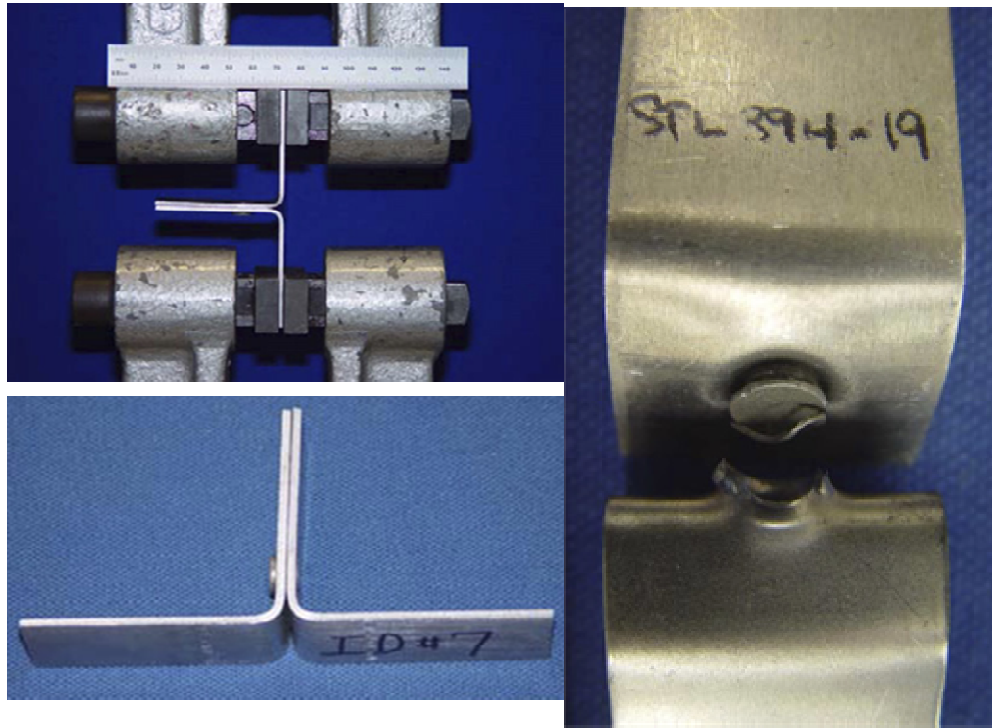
Peel test step-up showing specimen with a spot weld and spot weld failure [14].
